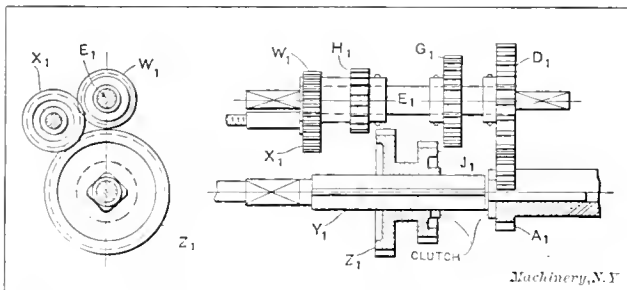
Sketch showing Arrangement of Gears in Transmission Case
